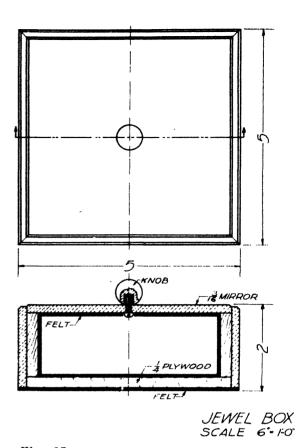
ASSEMBLY SECTION DRAWING OF JEWEL BOX
